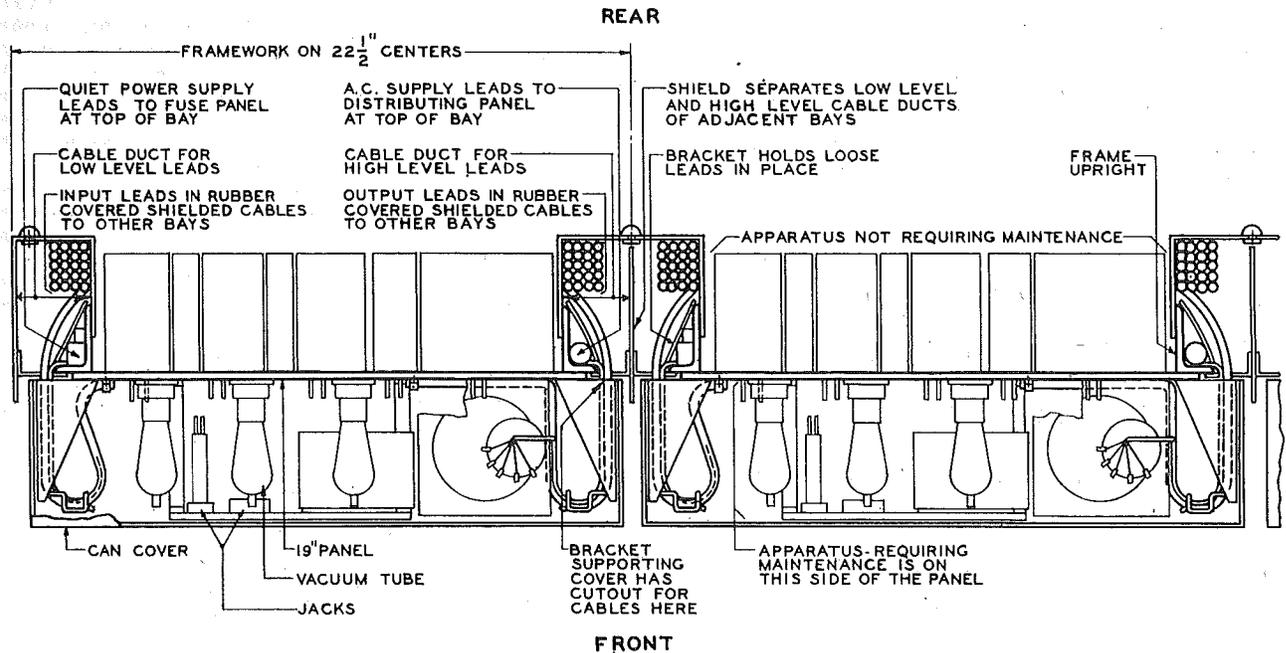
Single-Side Wiring and Maintenance Arrangement - Typical Plan View.
